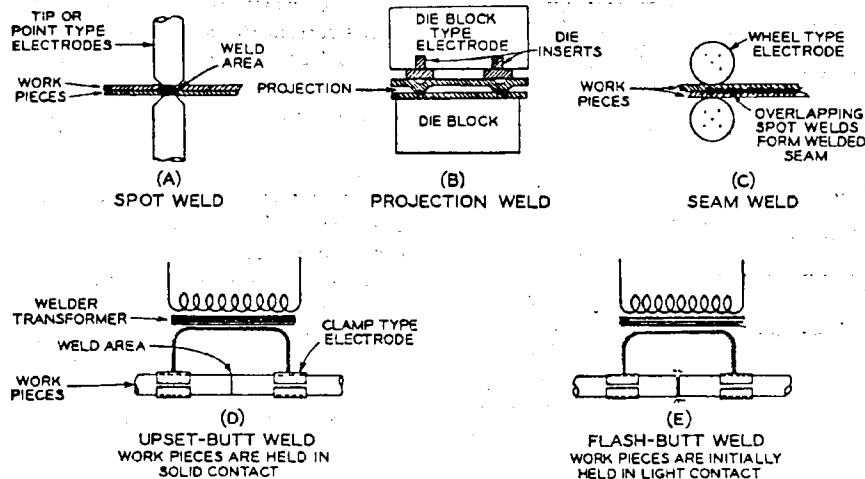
Types of welds: (A) Spot, (B) Projection, (C) Seam, (D) Upset-butt, (E) Flash-butt
